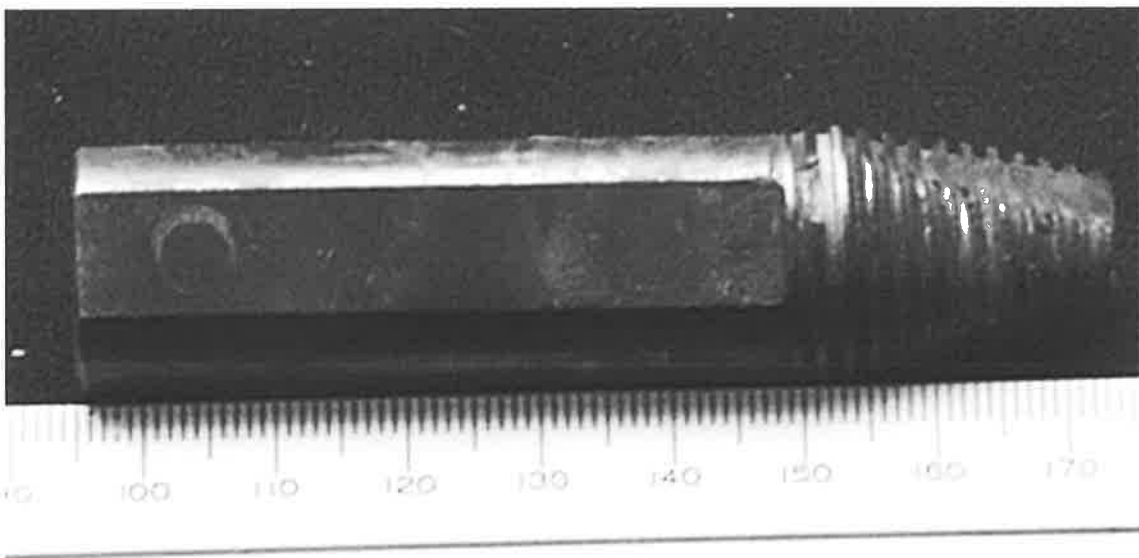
Weld pin CT2-20 used to produce weld 822A
